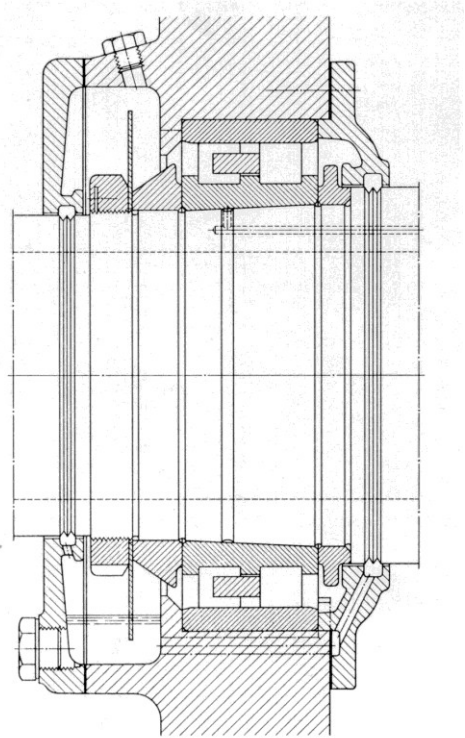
Spindle bearing arrangement having oil bath lubrication
